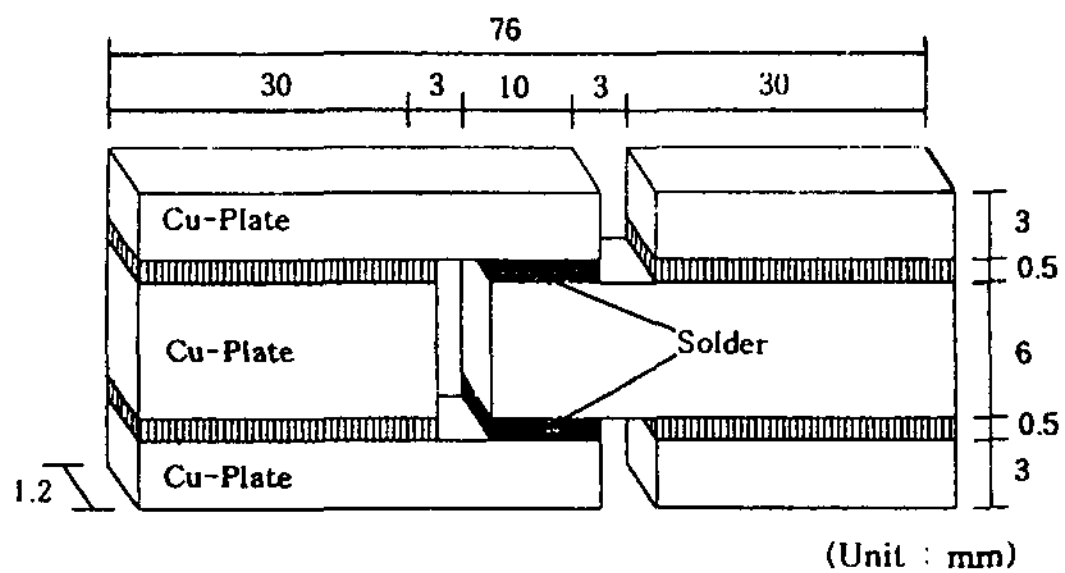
Shape of modified double lap shear joint specimen to test the strength of solder joint.
